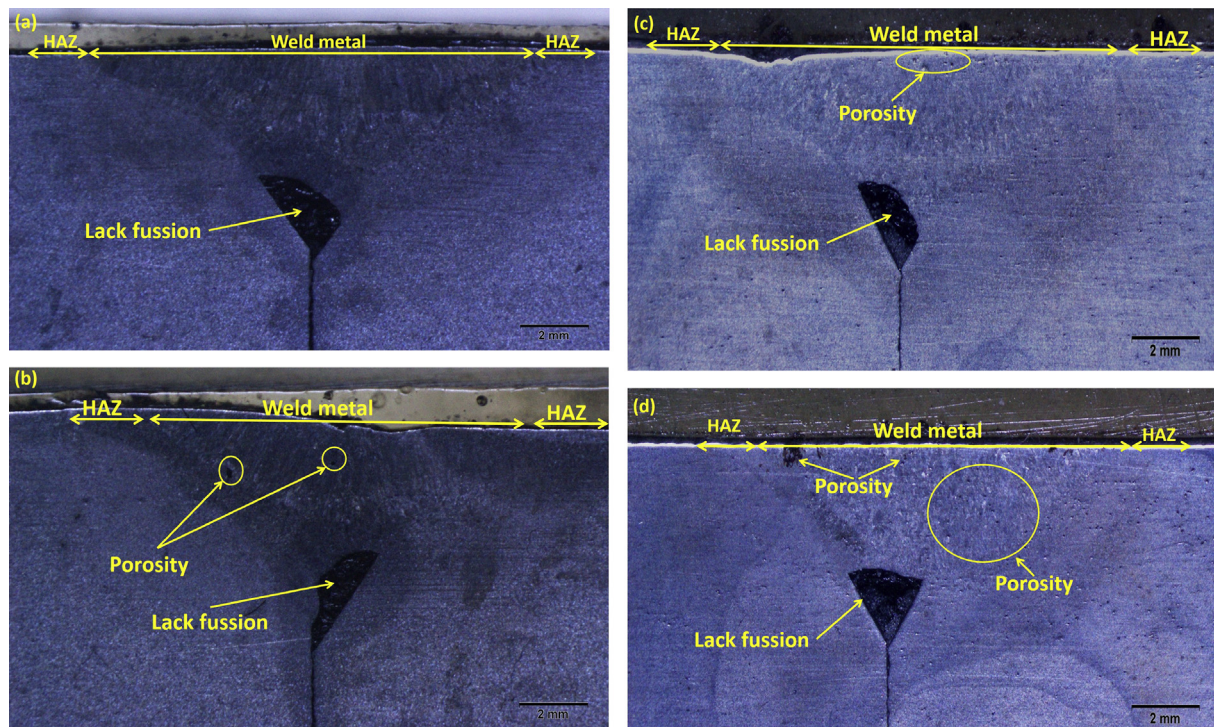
Macrostructure of weld metal (a) air weld (b) underwater weld in depth of 2.5 m (c) underwater weld in depth of 5 m (d) underwater weld in depth of 10 m.
